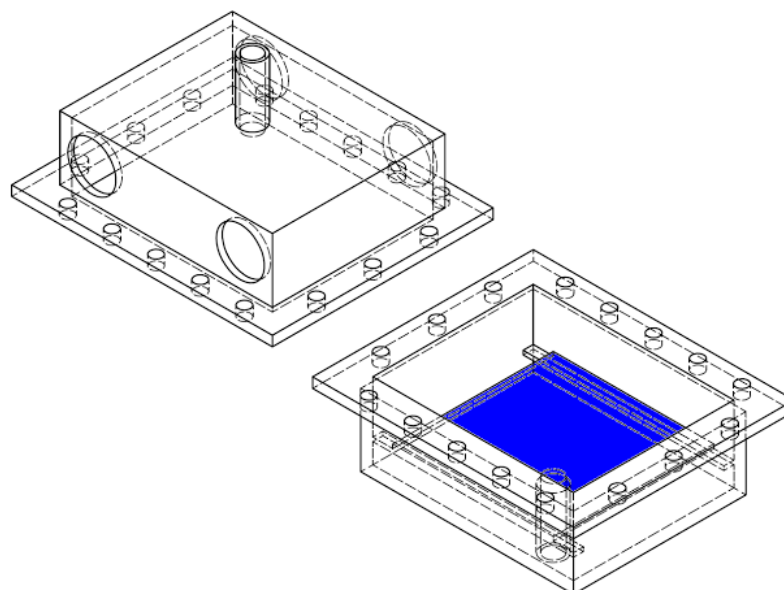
CAD drawing of the UV reactor for the tests of photocatalysts.
